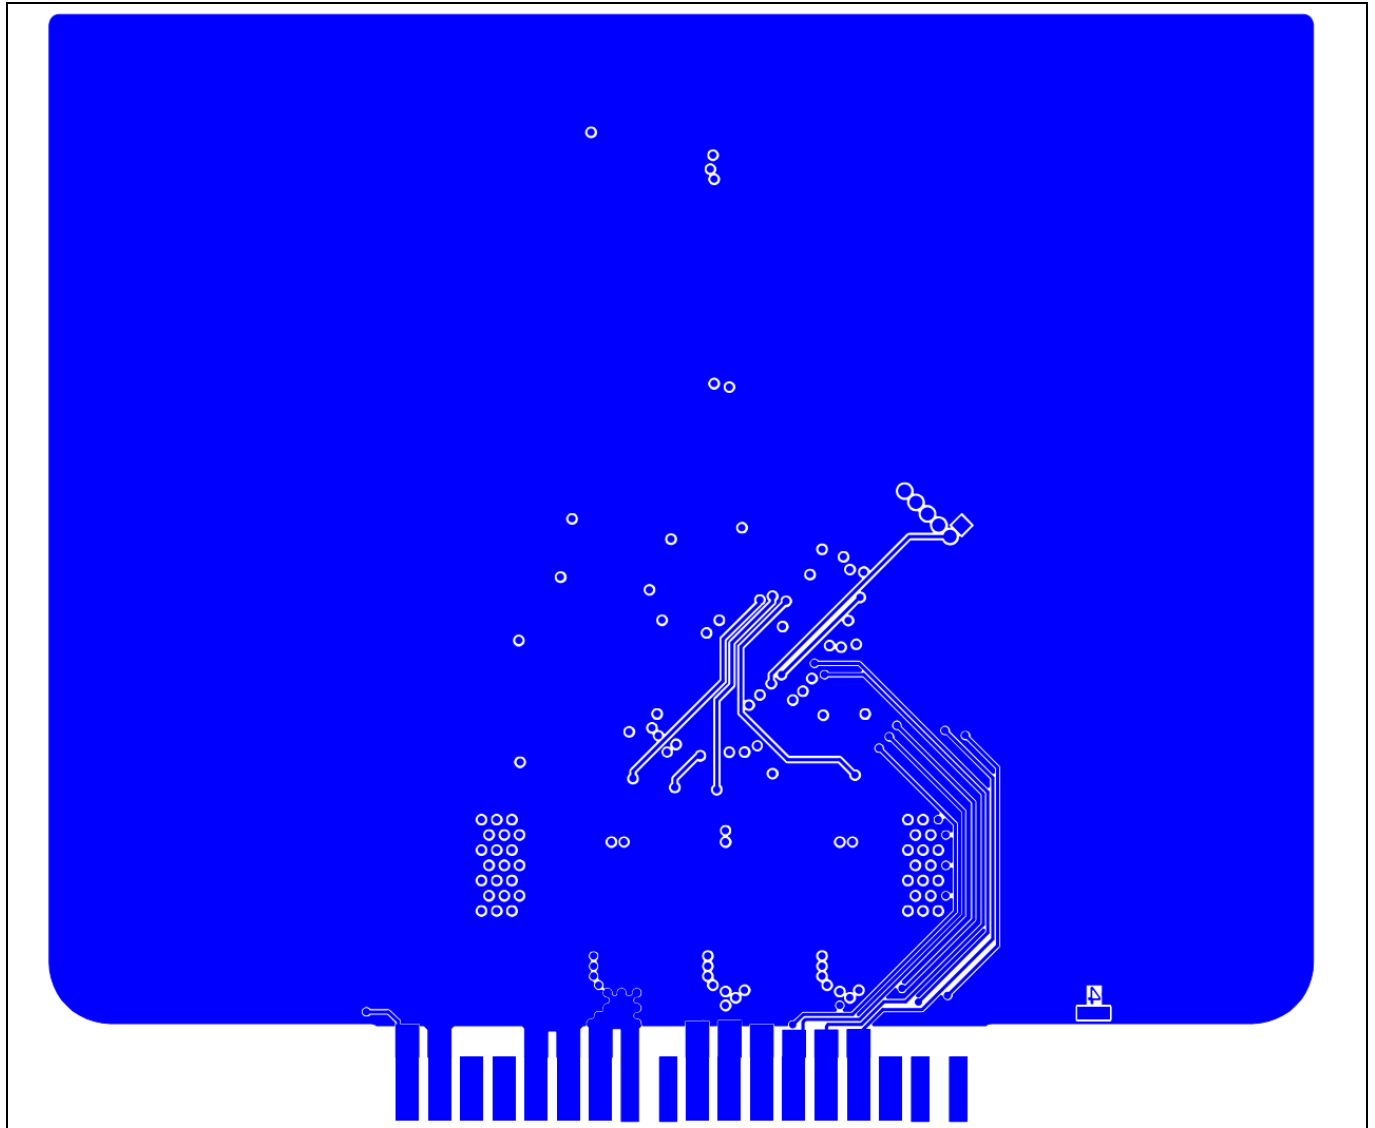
DEMO_IMR_MTRCTRL_V1 PCB bottom layer
